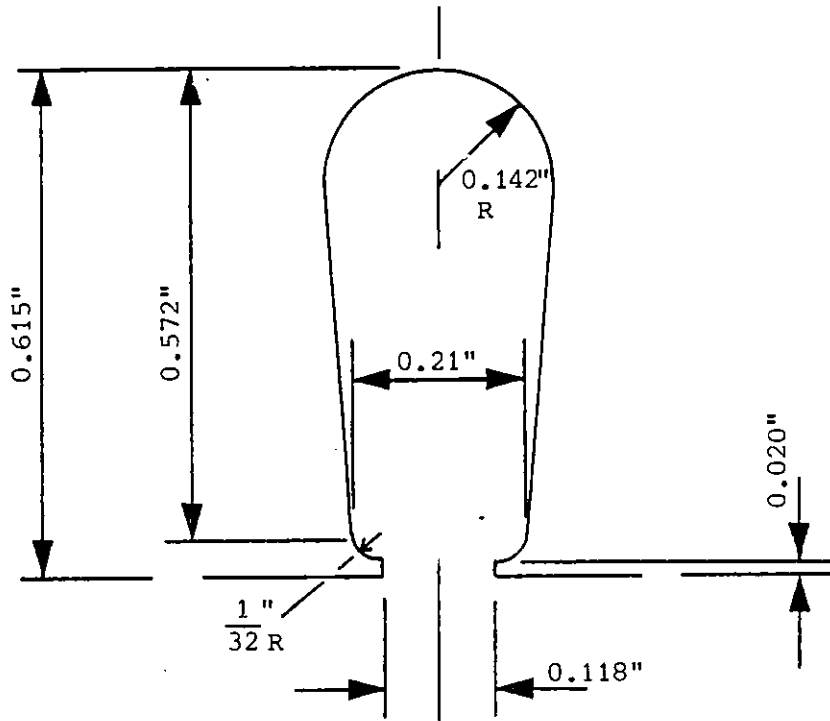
Dimensioned drawing of the test motor stator slots
